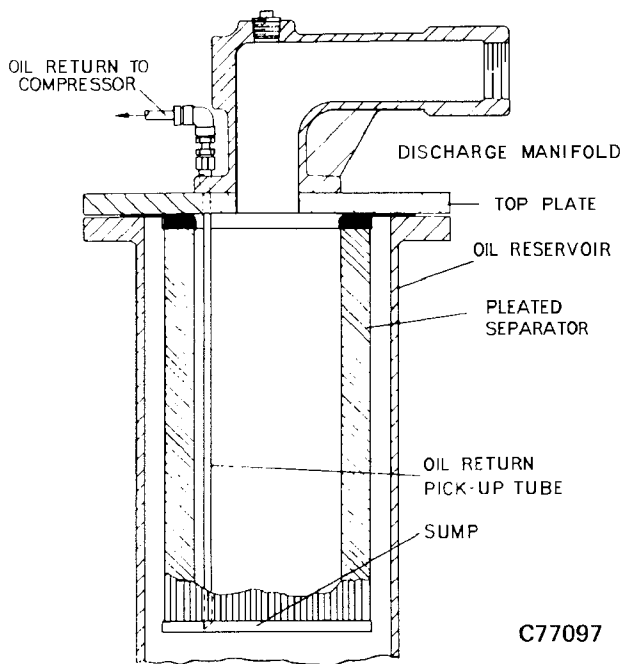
SINGLE ELEMENT OIL SEPARATOR
